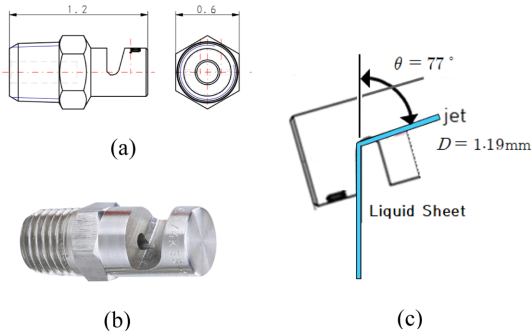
Splash plate nozzle; (a) dimensions, (b) photograph, (c) schematics of impinging jet
